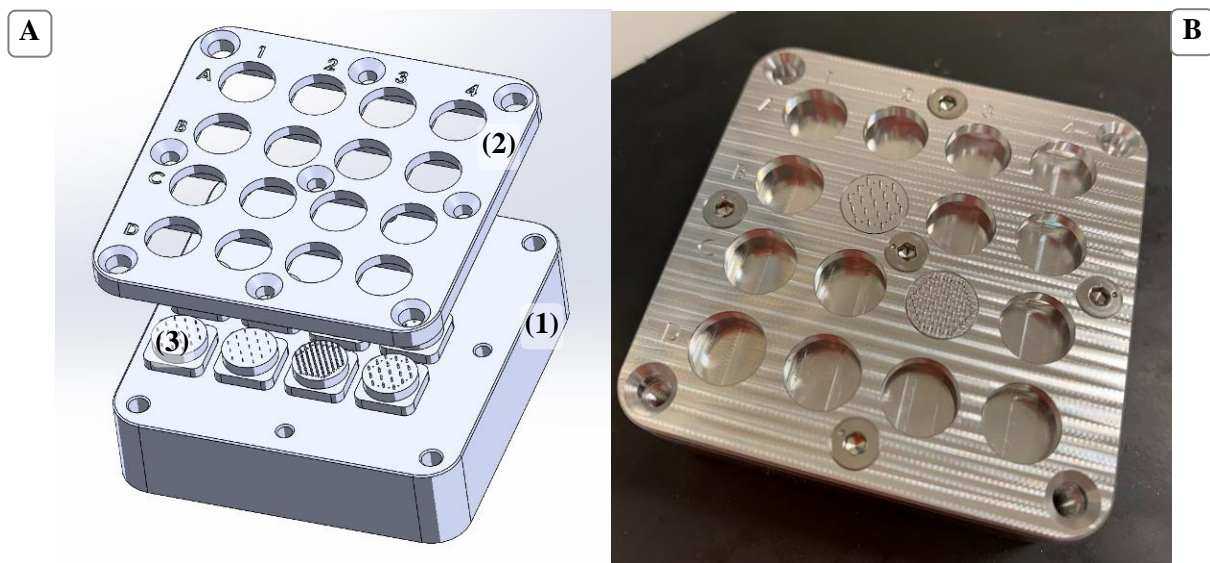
Customizable mold (A) CAD file and (B) picture with two MN inserts
